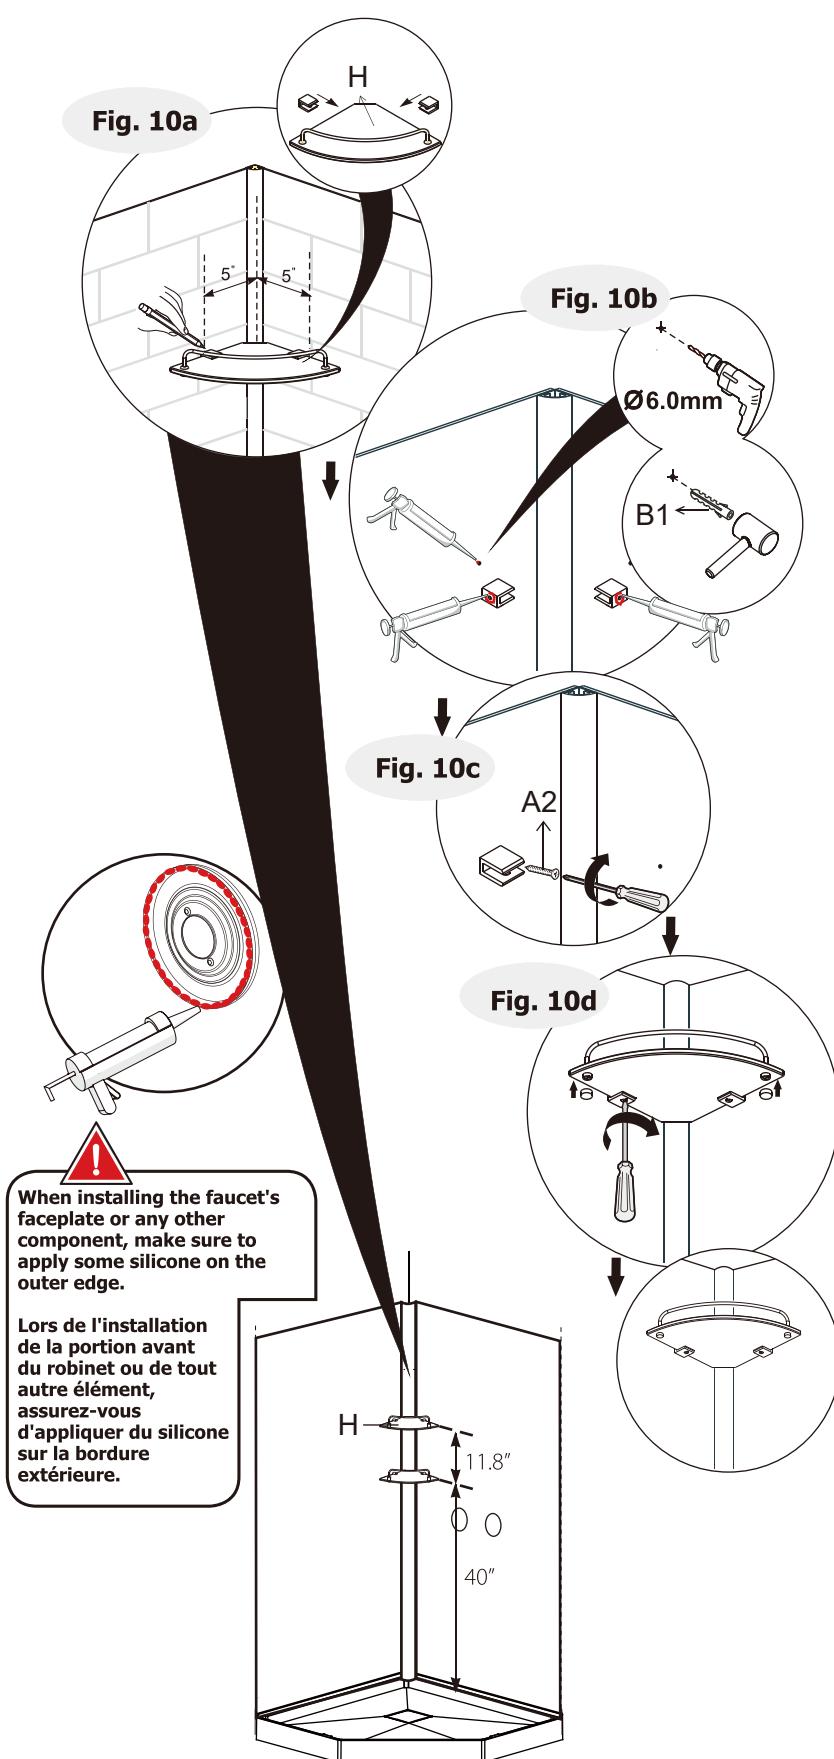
Place the shelf in the corner of the shower where you want to install it.
